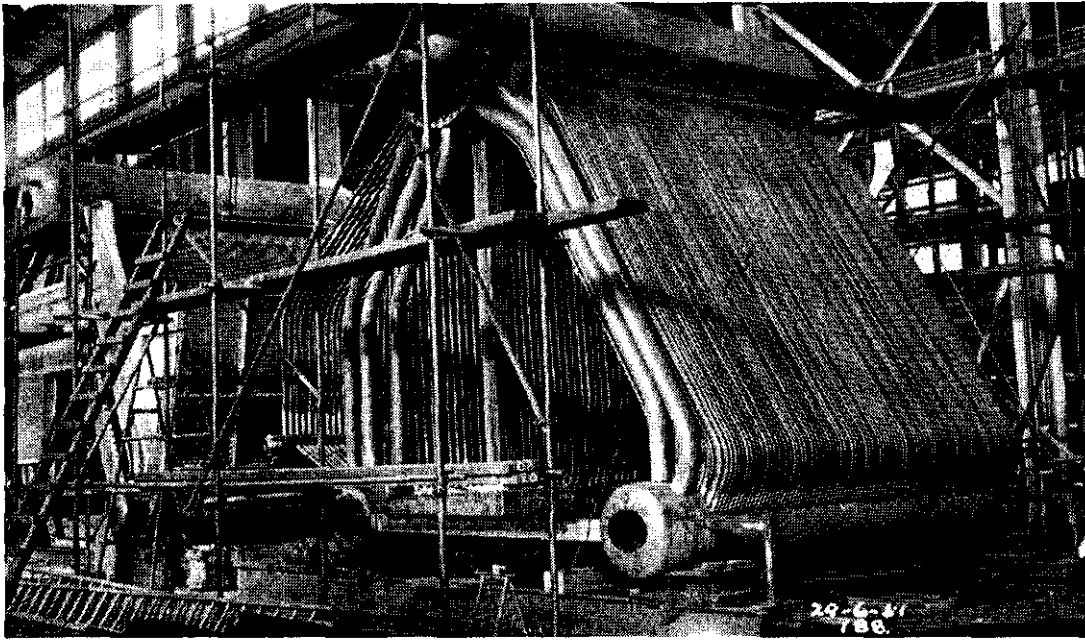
ASSEMBLY OF DARING FOSTER WHEELER BOILERS AT COCKATOO ISLAND
